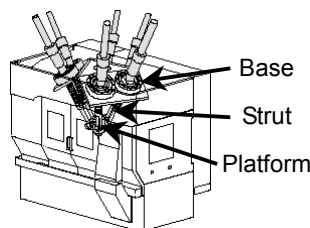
A Hexapod-type parallel mechanism machine tool, COSMO CENTER PM-600 by Okuma Corp.
